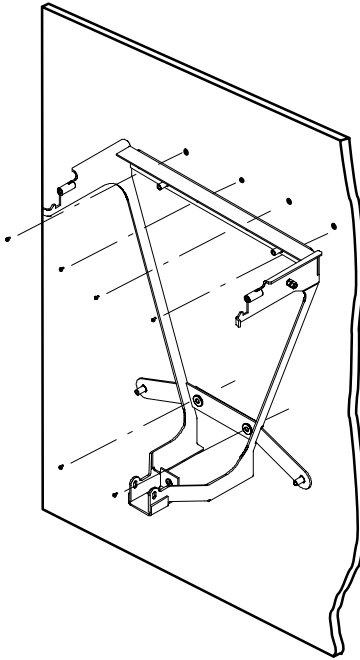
Holes to Use to Mount the Bracket to the Wall
